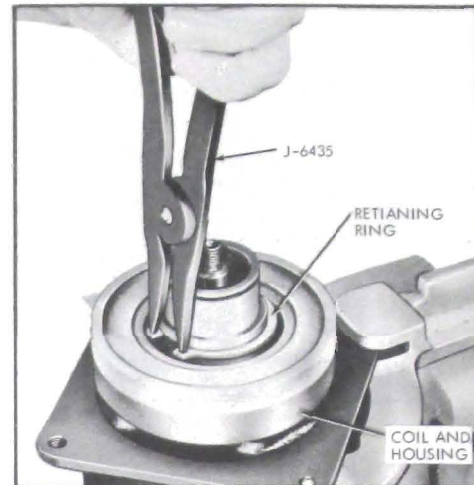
Removing or Installing Coil and Housing Retainer Ring
